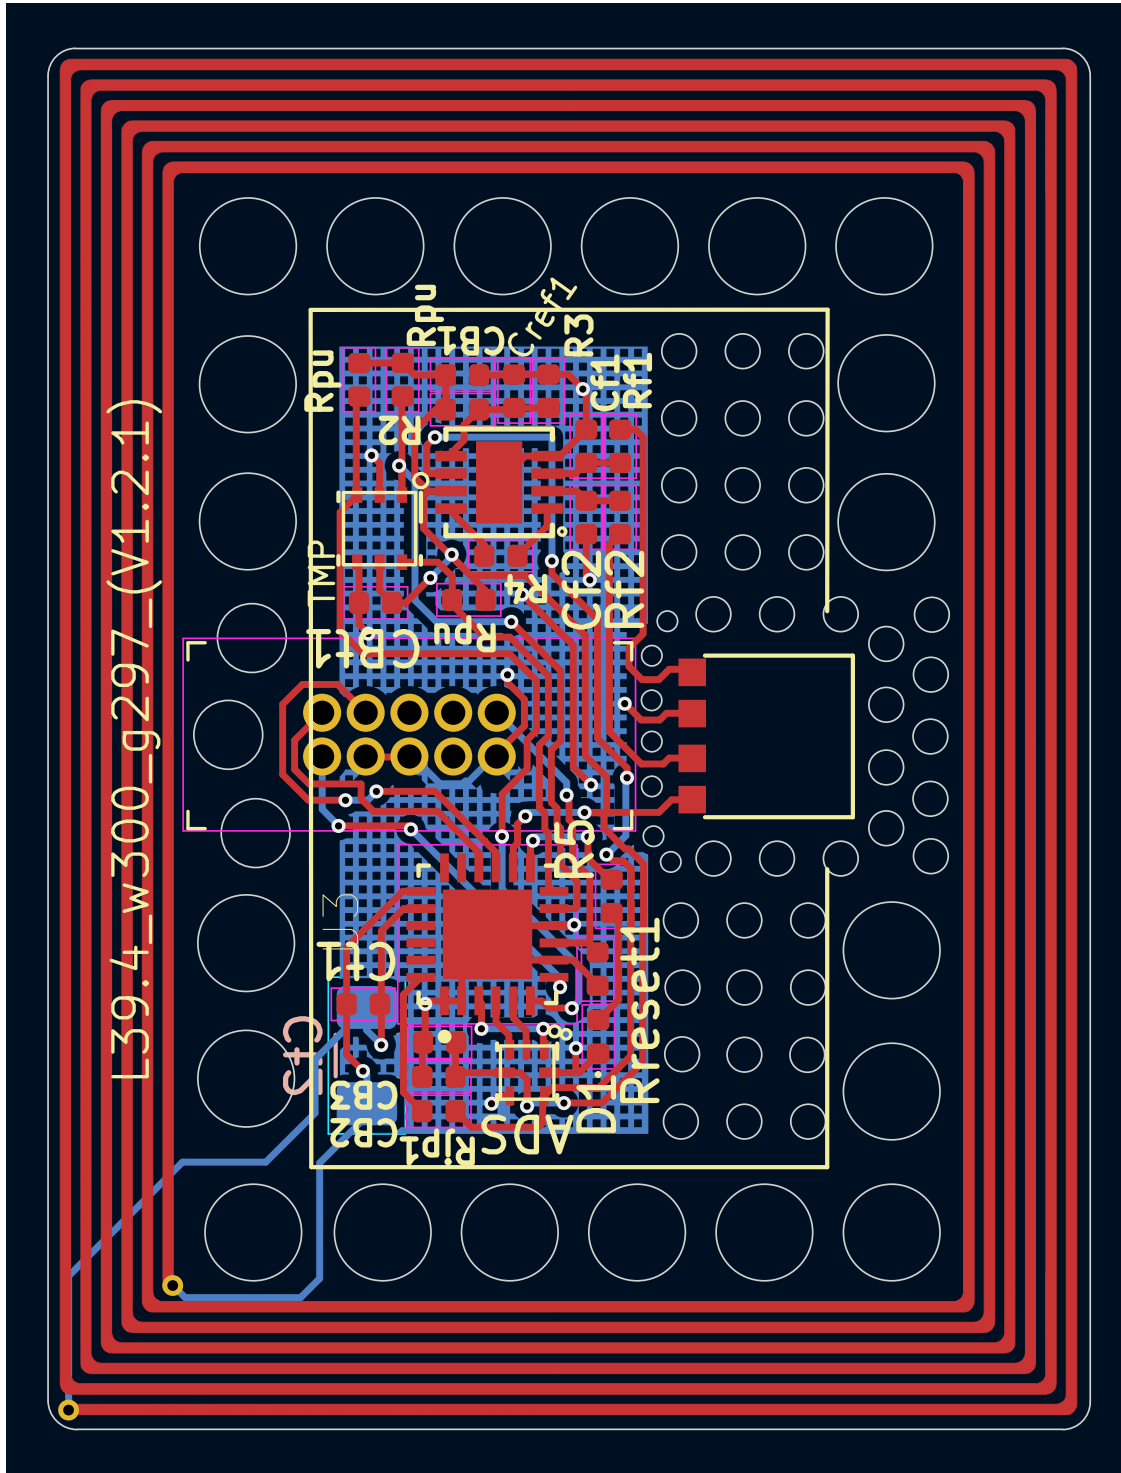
PCB Layout for piezoresistive sensor tag, designed in kiCad, [127].
